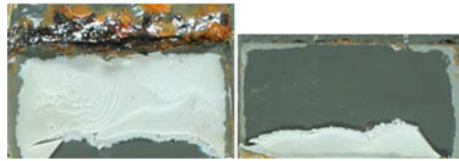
Fracture pattern of injured specimen near bond line after ageing, CDC2, 2C-AY
